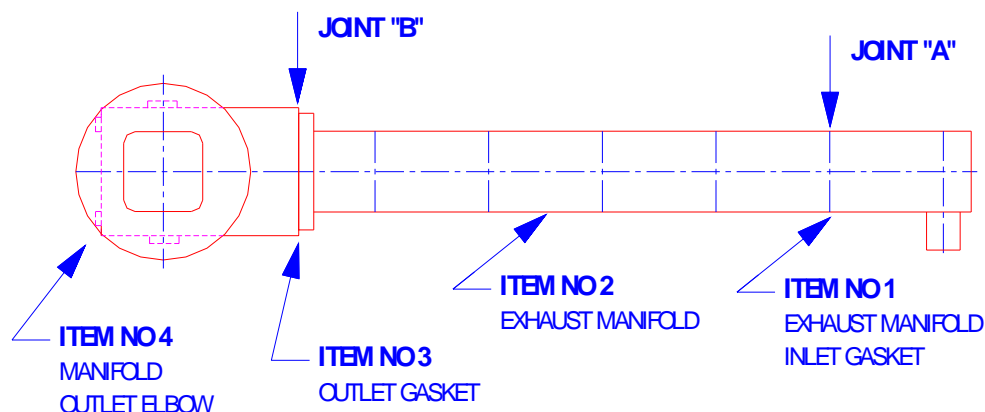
Exhaust System from Manifold to Manifold Outlet Elbow
